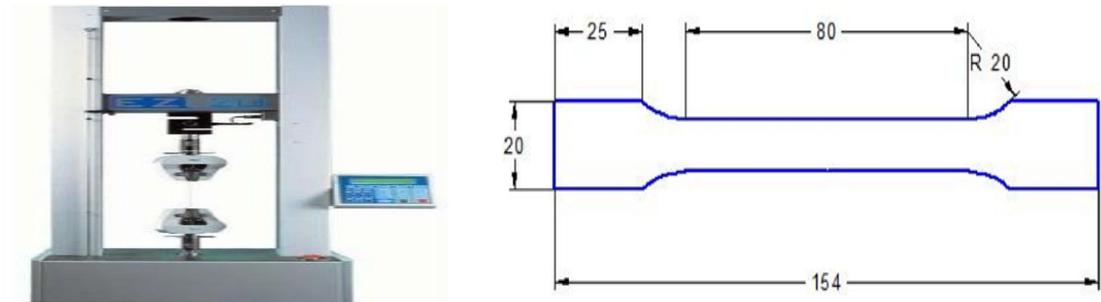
Computerized Universal testing machine and Dimensions of Tensile test specimen (mm)
